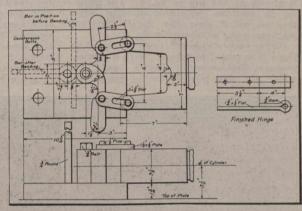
Hinge Forming Blocks for Dump Car Aprons.
